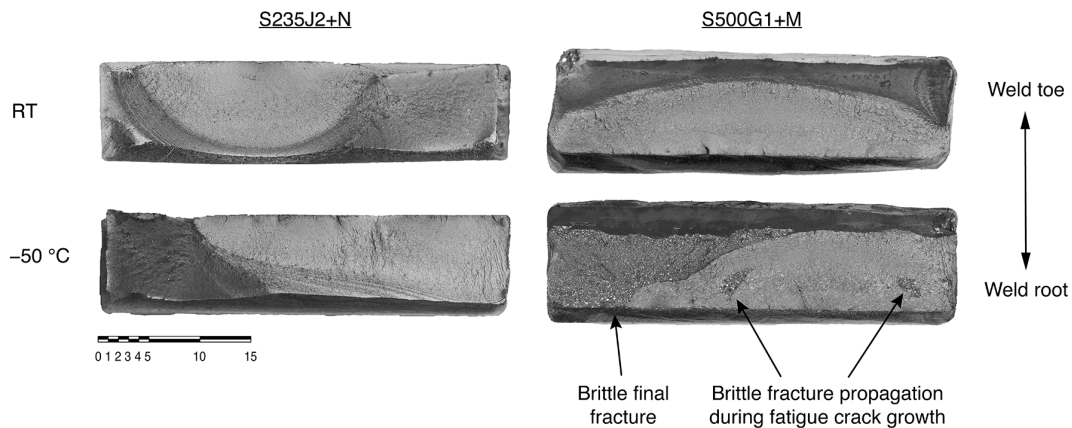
Fracture surfaces of butt-welded joint specimens (scale in millimetres), adopted from Braun et al. (2021a)
